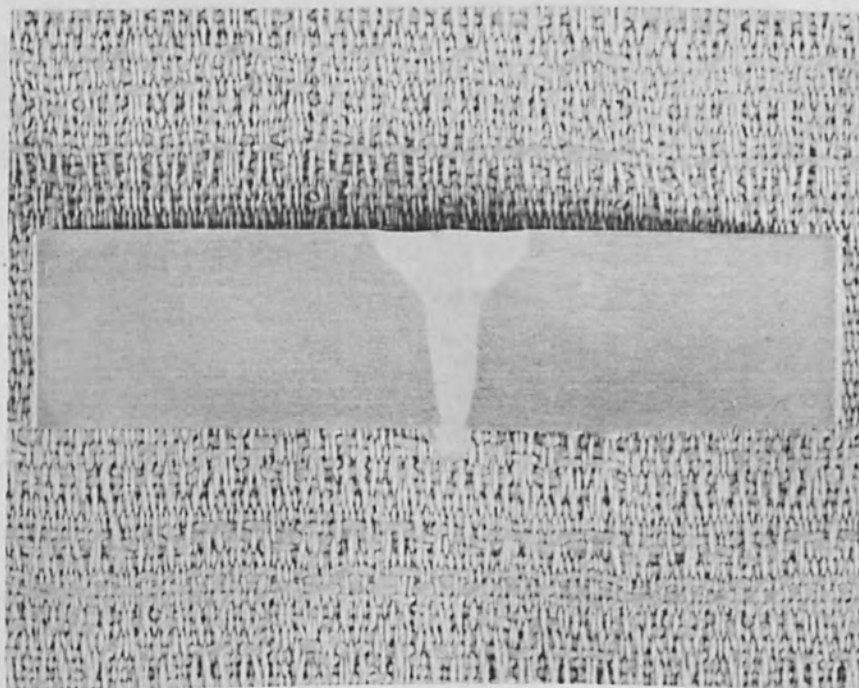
Butt weld in 1/2" aluminum alloy 2219.
